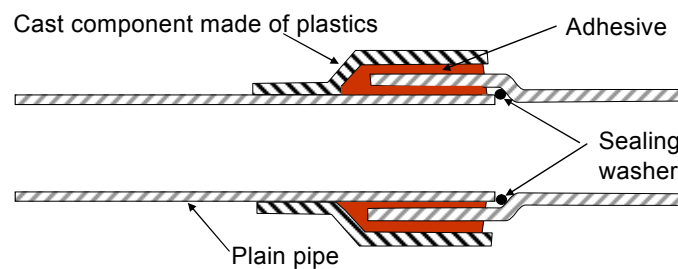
Developed joint design geometry for steel pipes up to 600 mm in diameter.
